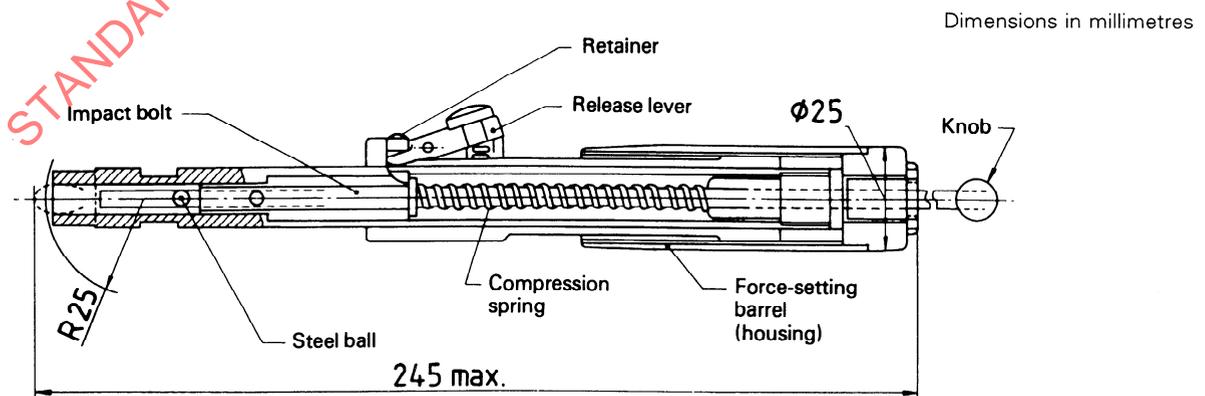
Impact tester (shown with spring compressed) (see 11.3.1)
